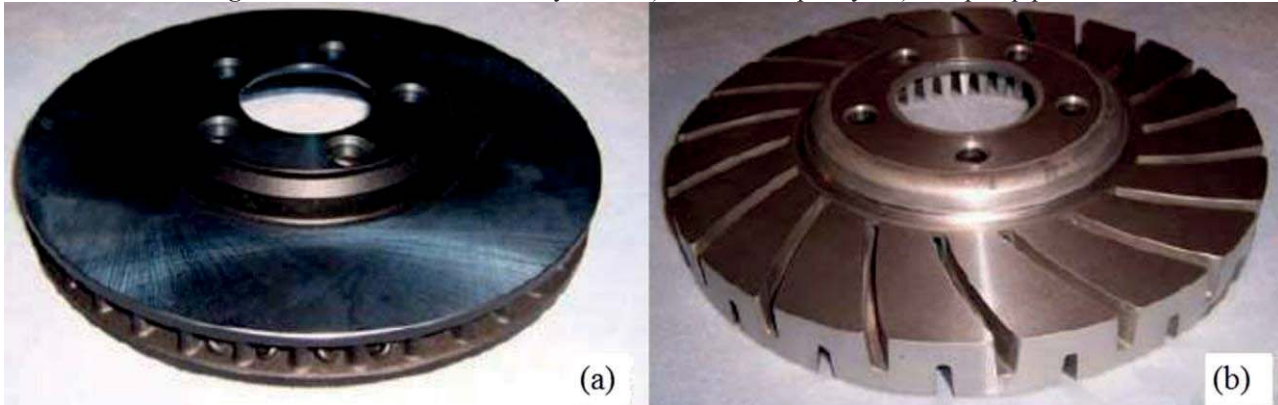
Brake disk: a) Brake disk (weight: 8.44 kg), manufactured from gray cast iron used in the sedan automobile, b) brake disc made of Al-SiC composite material (weight: 3.32 kg) specially designed for the same automobile
